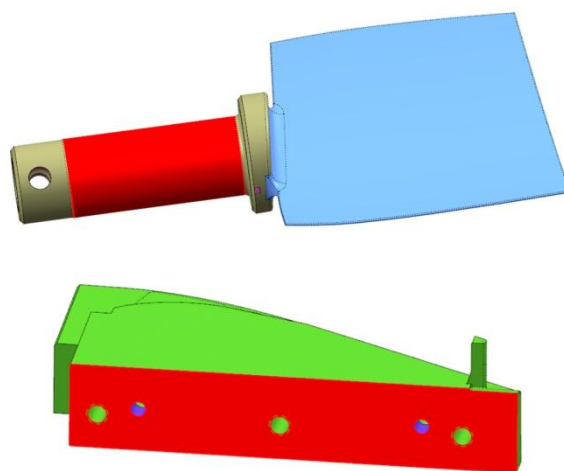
Examples of major base surfaces of the parts "slider" and "guide vane"
